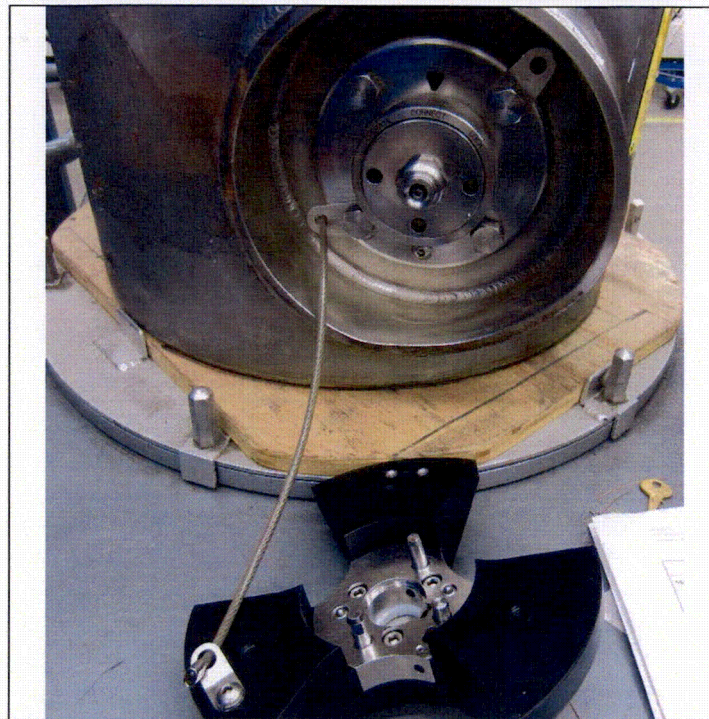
Port "A" - Close examination with dust cover removed
